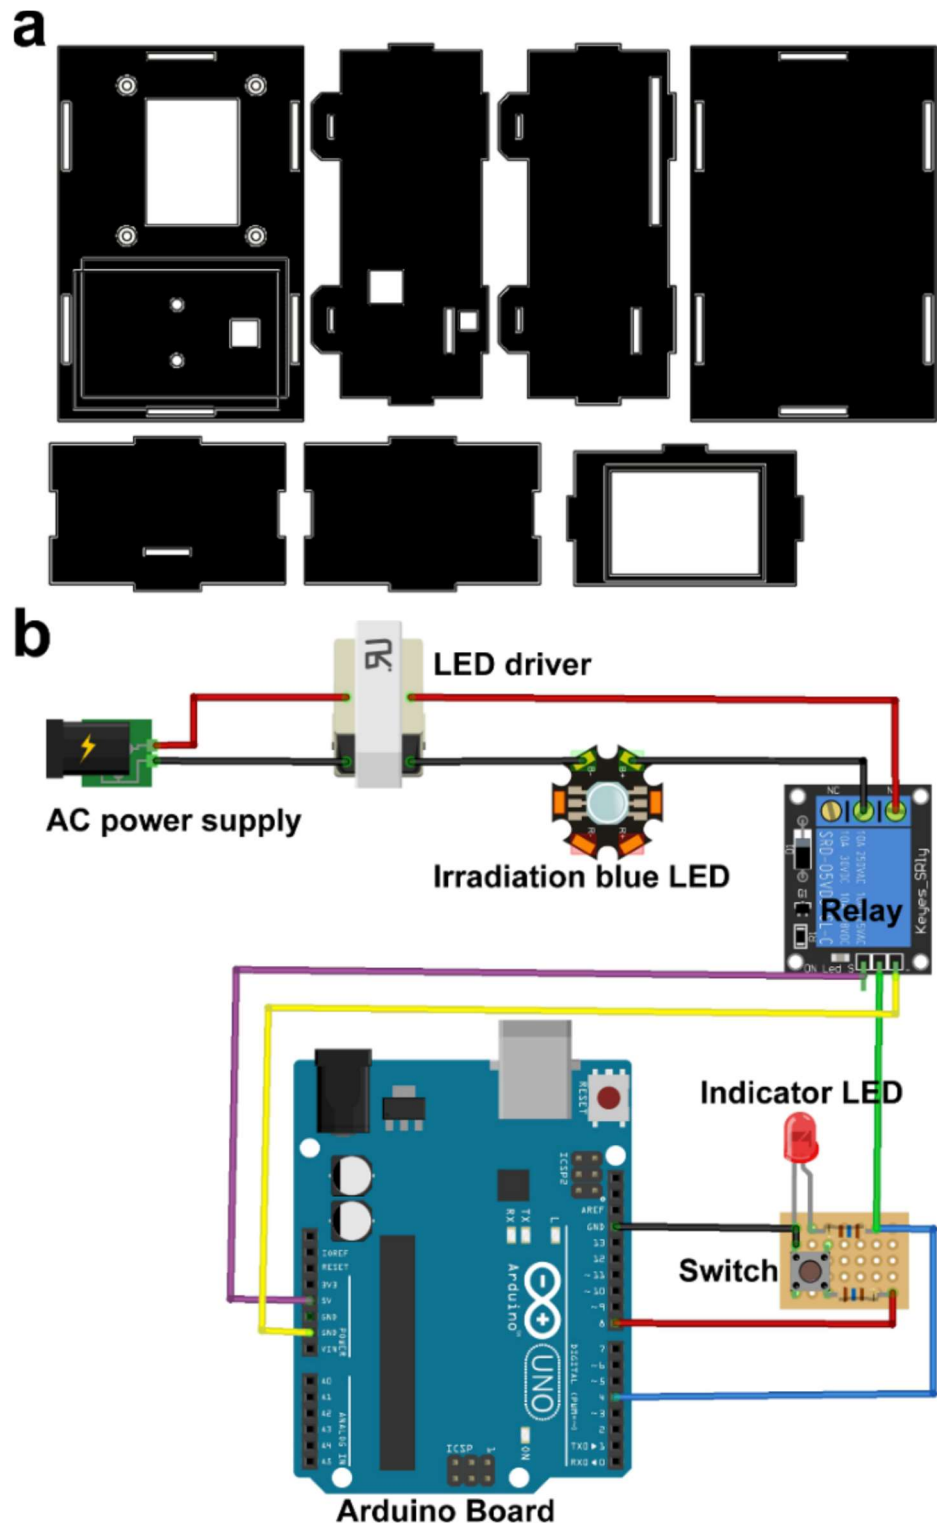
Schematic illustration of the housing (a) and electrical (b) designs of the FLASH reader.
